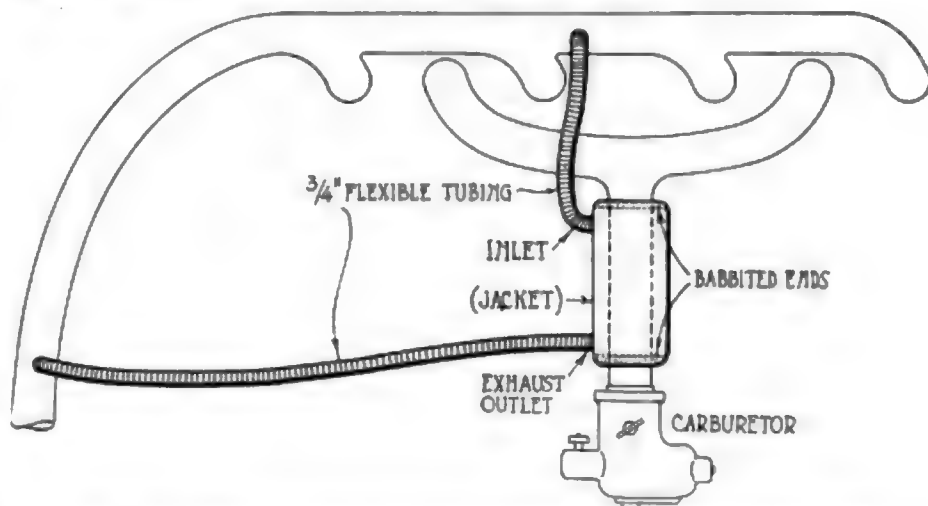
Installation which may be added to the old carburetion system to take care of the present low grade of gasoline.
